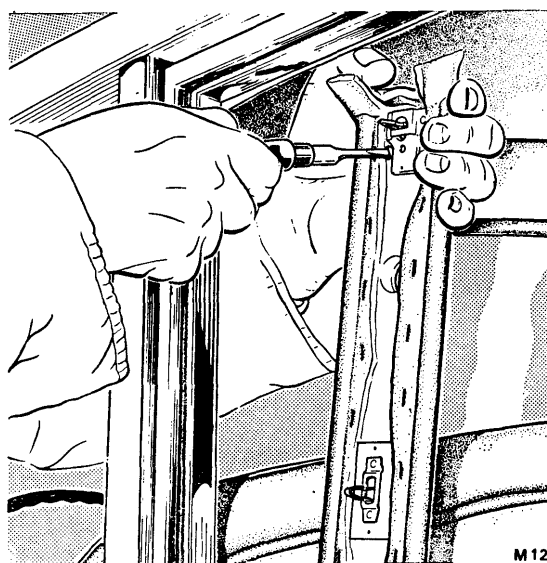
FITTING A FRONT SEAT BELT STORAGE CLIP TO THE CENTRE PILLAR TRIM PANEL
